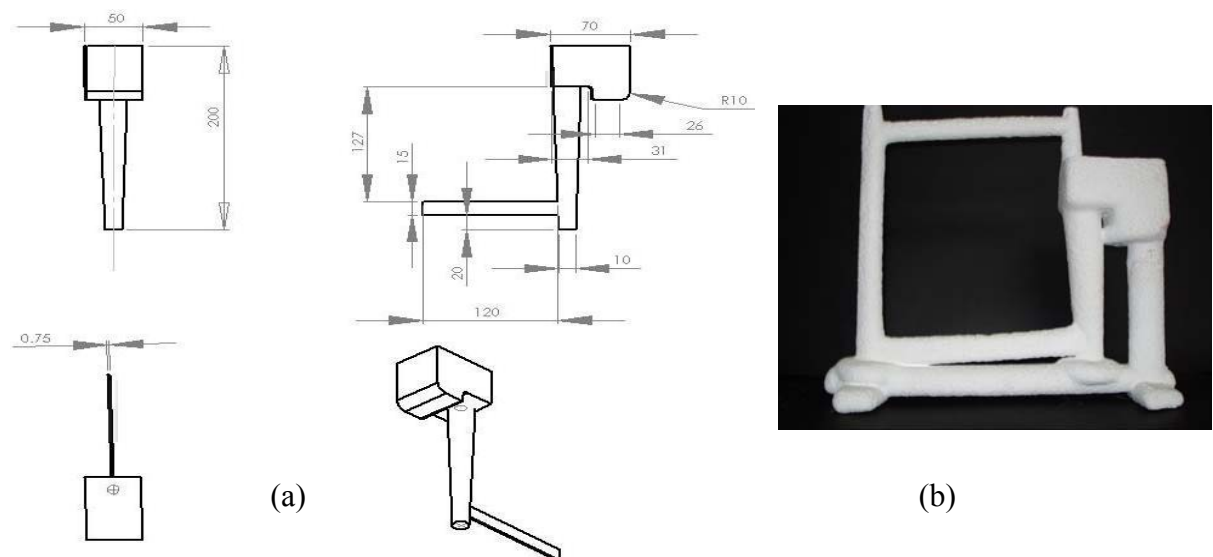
(a) Mould design for velocity measurements, horizontal strip thickness 0.75mm metal height 170mm, pouring temperature 750°C , mould temperature 660°C - 700°C (b) ceramic mould
